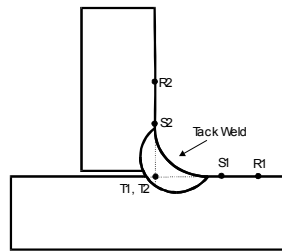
Position of R, S and T-points in case of tack weld in T-joints.
